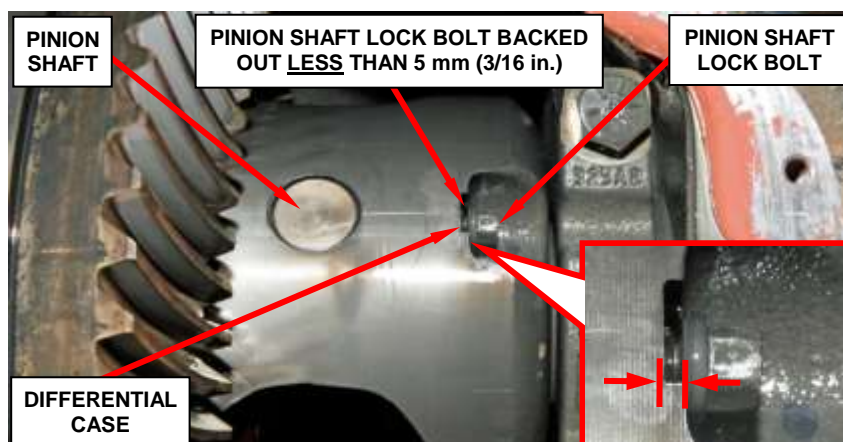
Pinion Shaft Lock Bolt Backed Out Less Than 5 mm (3/16 in.)
